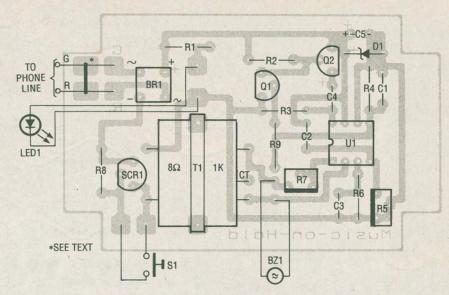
After you've etched and drilled your board, and obtained the parts listed in the Parts List, assemble the circuit using this diagram as a guide.
